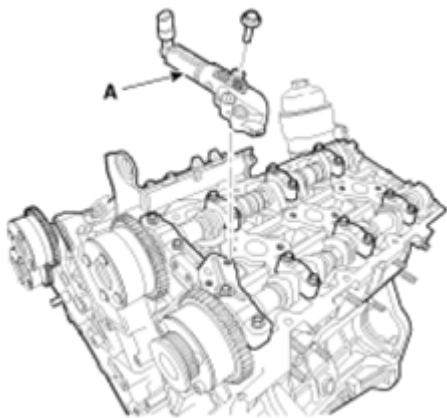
Identifying LH/RH Exhaust Camshaft OCV
